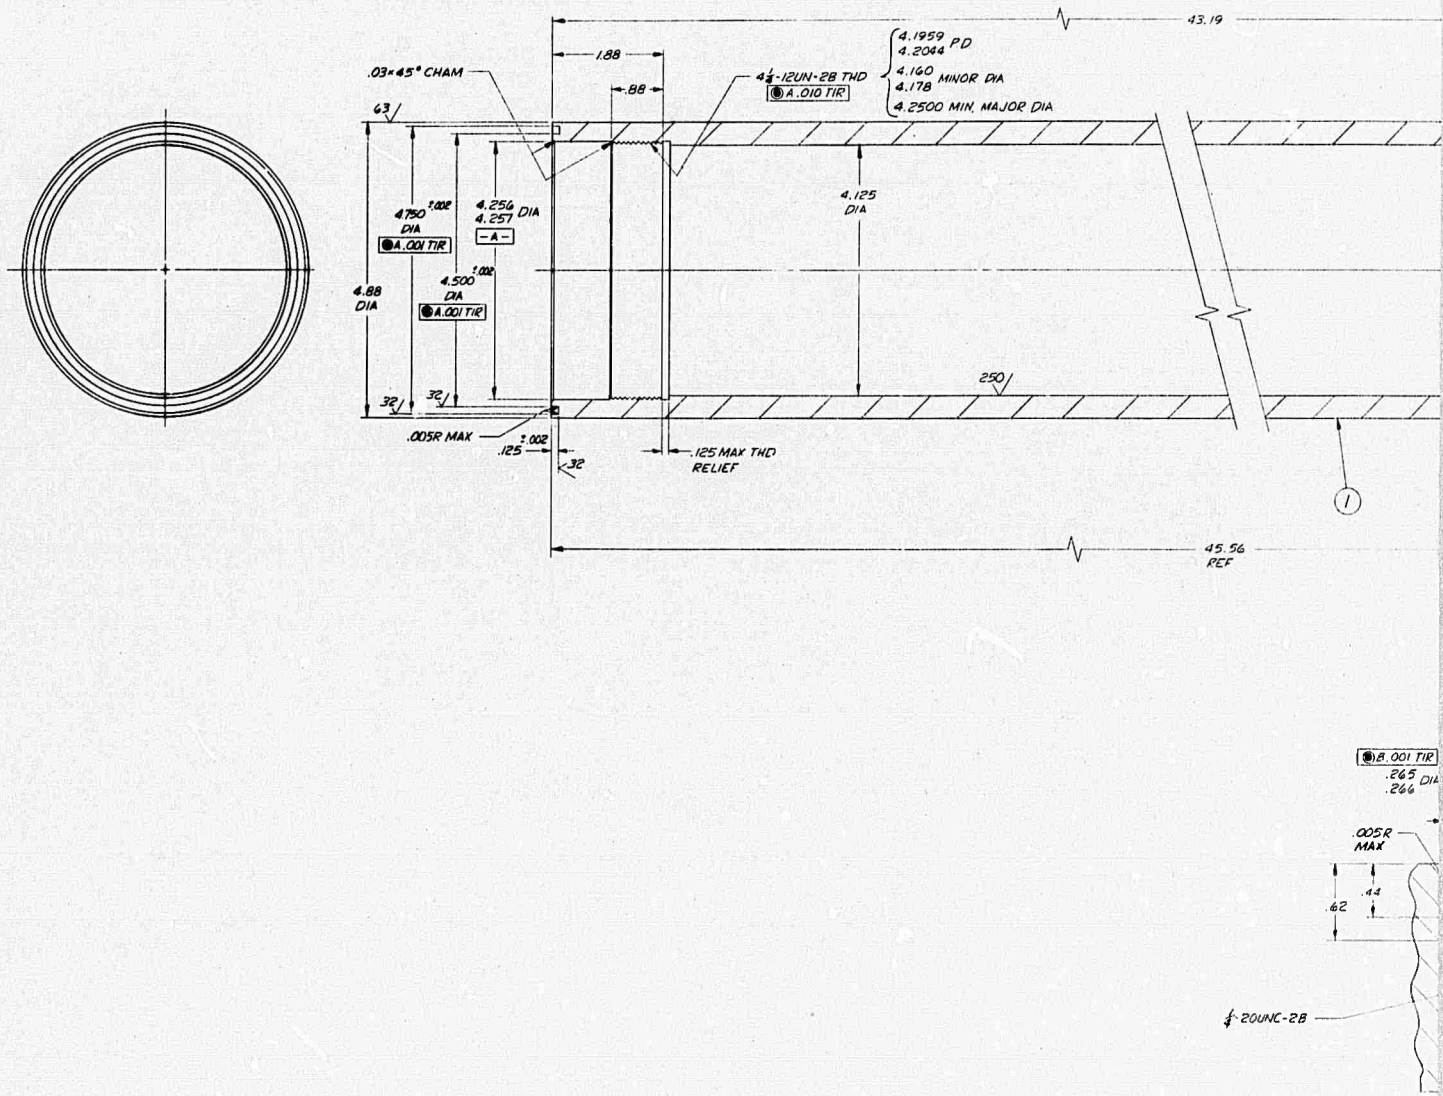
DETAIL DRAWING OF PRESSURE CASING,
